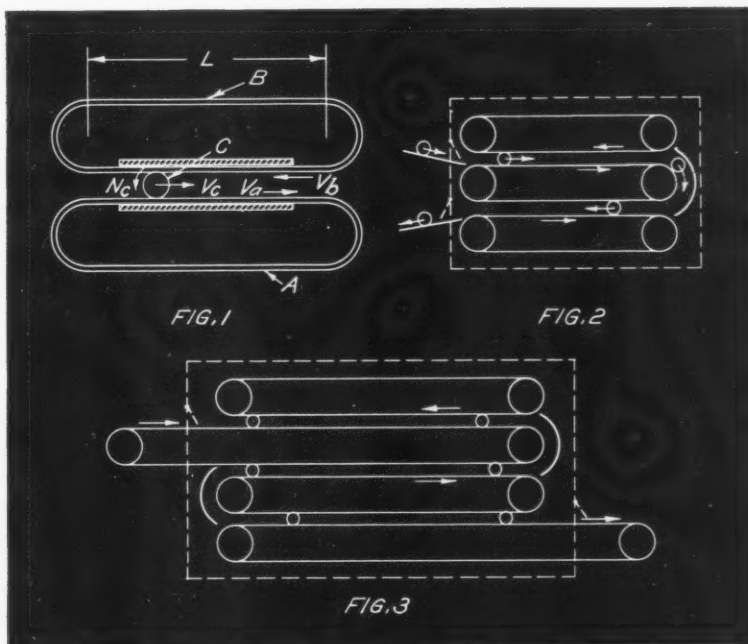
A cylinder is conveyed and rotated simultaneously between two belts running in opposite directions and at different speeds. Fig. 2. Three belts permit a shorter oven to be designed, charging and discharging both being performed at the front. Fig. 3. With a fourth belt, the cans are discharged at the rear of the oven.
